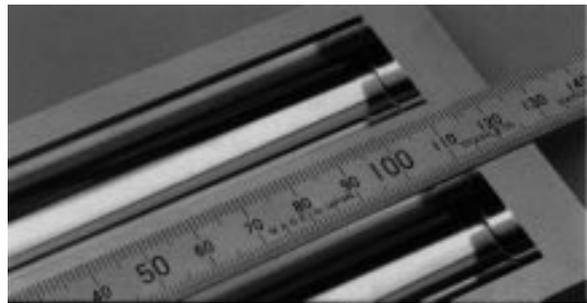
An SKD61 cold-forging die machined by the VPX10 to a surface roughness of $0.8\mu\text{m}R_{\text{max}}$ using a copper tool. Machining time is six hours with oil dielectric fluid and 3.7 hours with mixed silicon powder.
